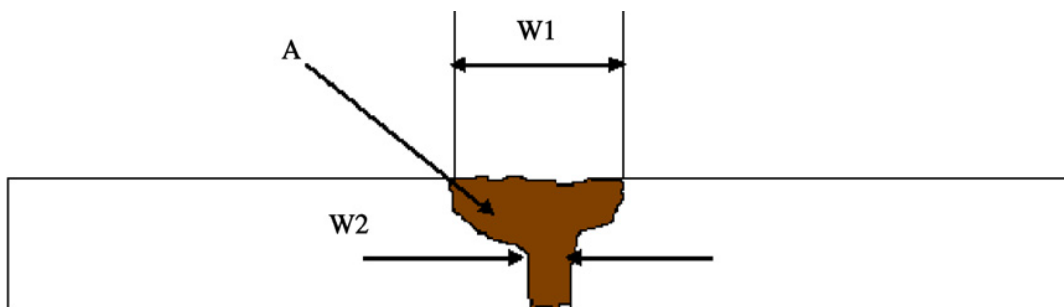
Shows the positions of welding pool geometries on the specimen.
